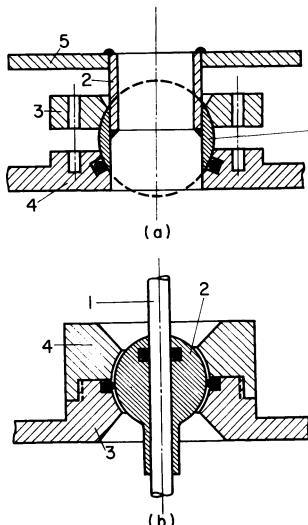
Seals for angular motion, using O-rings sealing against spherical surfaces: (a) only tilting. After Lee⁷⁵⁴ (*Courtesy of The Institute of Physics and The Physical Society, London*) ; (b) with sliding motion. After Retzloff¹⁰⁴⁸ (*Courtesy of The American Institute of Physics*)
